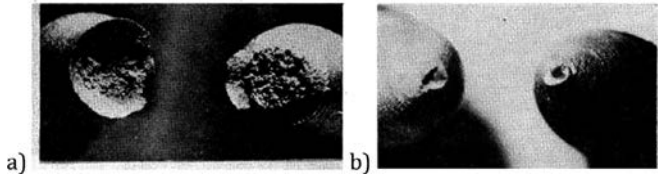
Fracture surfaces of the same steel specimen broken (a) at atmospheric pressure and (b) at 1850 MPa hydrostatic pressure [26].
